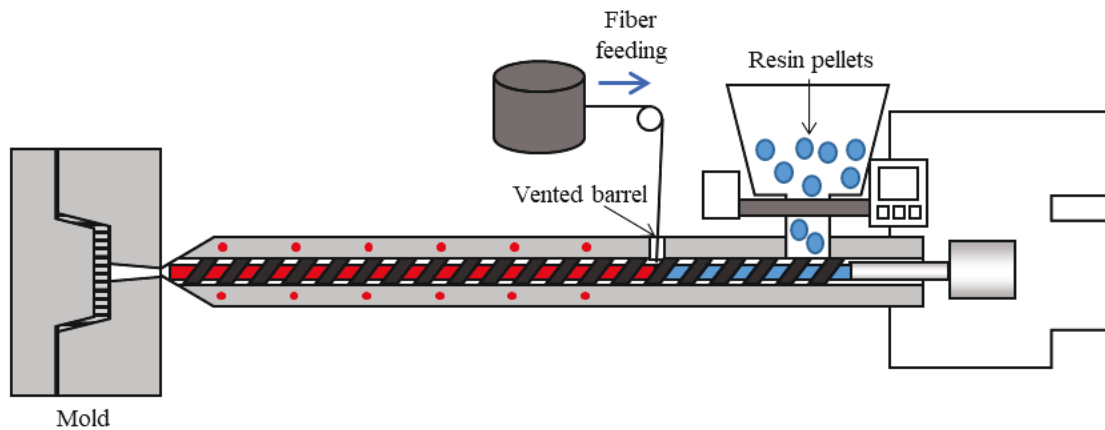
Schematic drawing of direct fiber feeding injection molding process.
